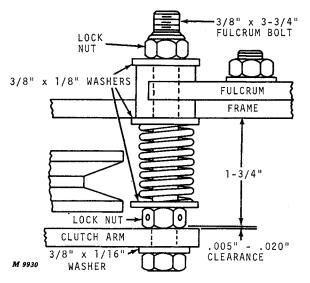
Spring-Loaded Fulcrum Bolt Detail
